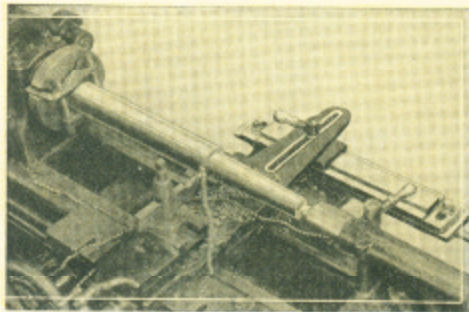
Turning a Long Taper, Using the Taper Attachment.
